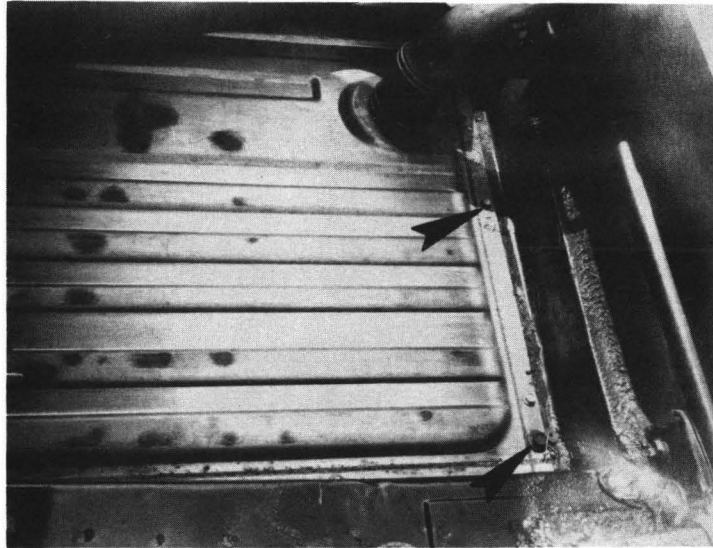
1966 Ford Mustang Fuel Tank Mounting
